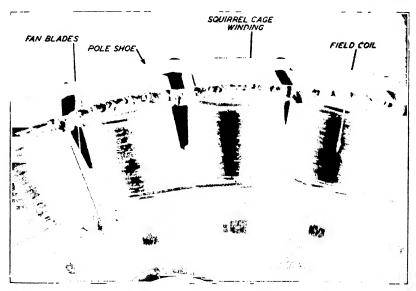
A Partial Rotor Assembly Showing Method of Fastening Field Coils and Poles to Rotor
